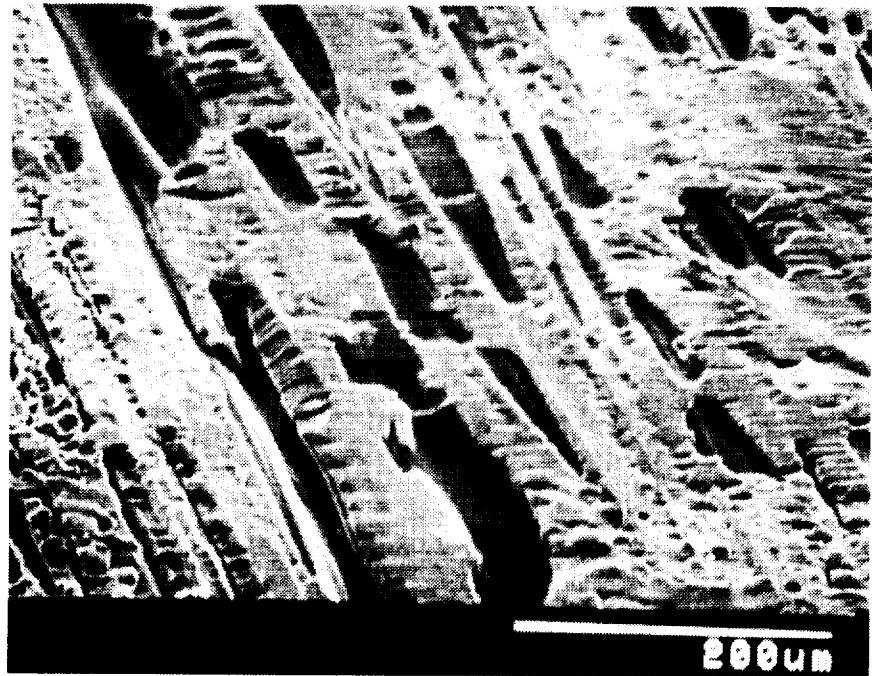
Surface Fracture of 5 second Weld at 1.75kW,120kHz and 0.689MPa.
